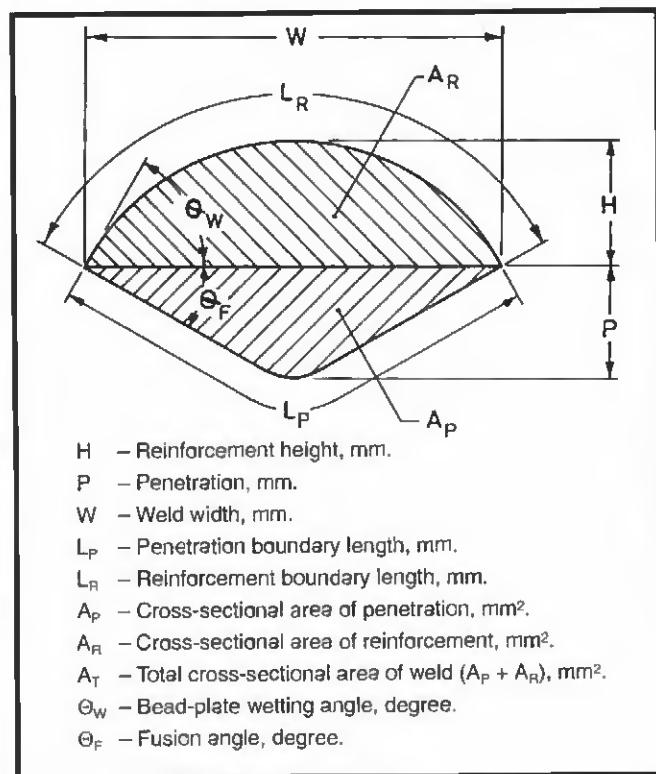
Bead-on-plate weld bead geometry.
